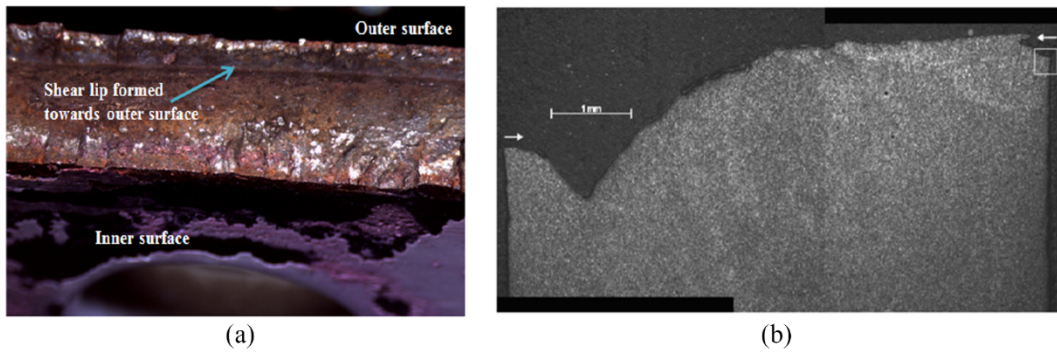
(a) Section of the crack zone shows shear lip towards outer surface indicating crack origin on inner surface of frame (b) Optical micrograph of the cross sectioned frame fracture.
